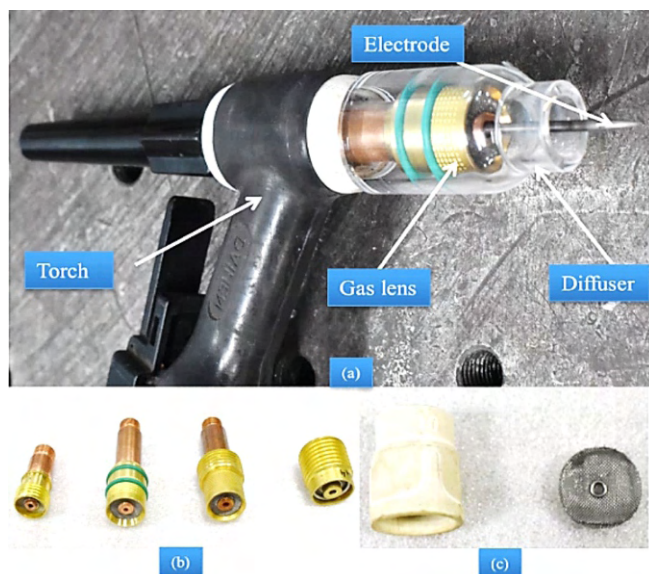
(a) Gas lens with diffuser mounted on welding torch, (b) various gas lens assemblies, and (c) diffuser.
